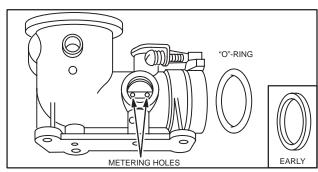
METERING HOLES AND "O"-RING, TYPICAL
